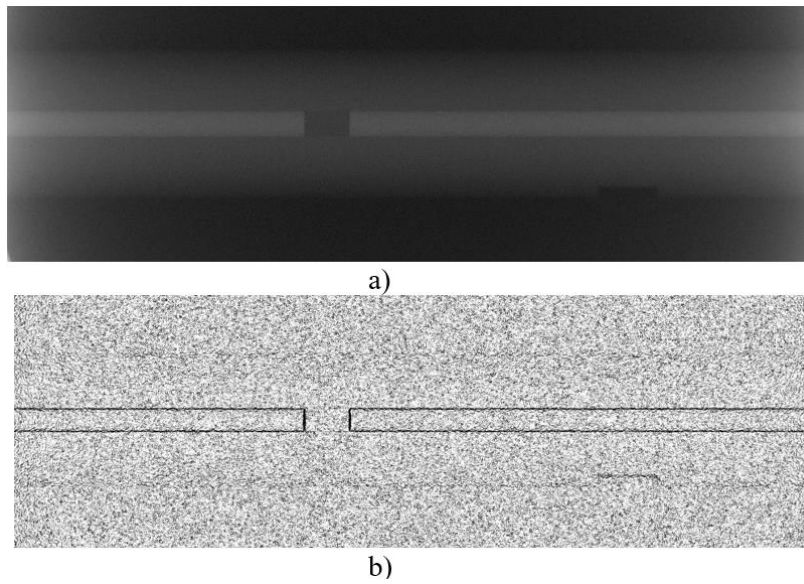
a) Welded plate radiograph using gamma ray. b) edge detection profile
